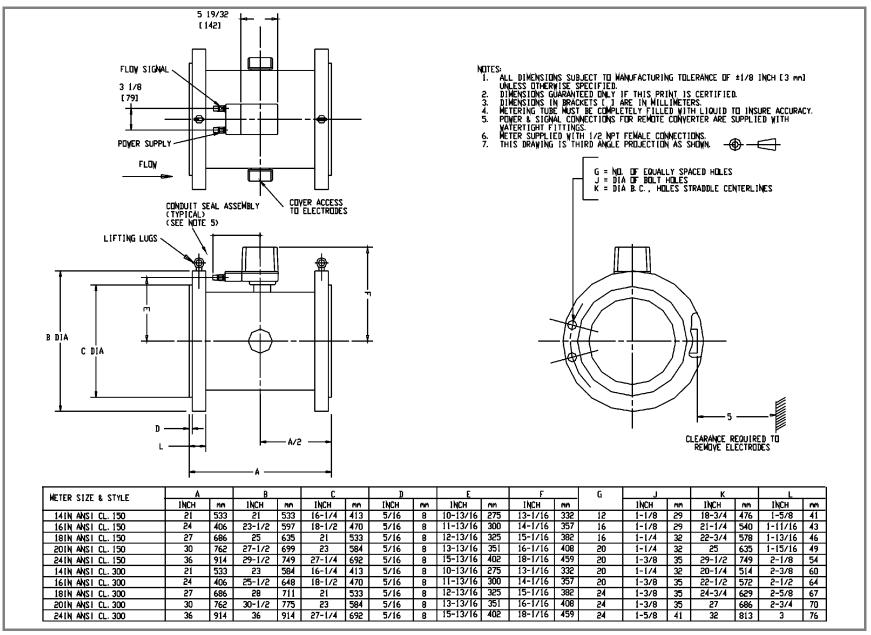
OUTLINE DIMENSIONS, 14 THROUGH 24 INCHES
